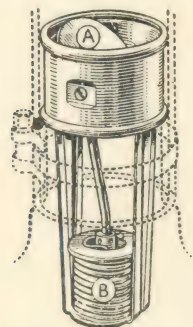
BUTTERFLY VALVE TYPE OF THERMOSTAT (AUSTIN)
